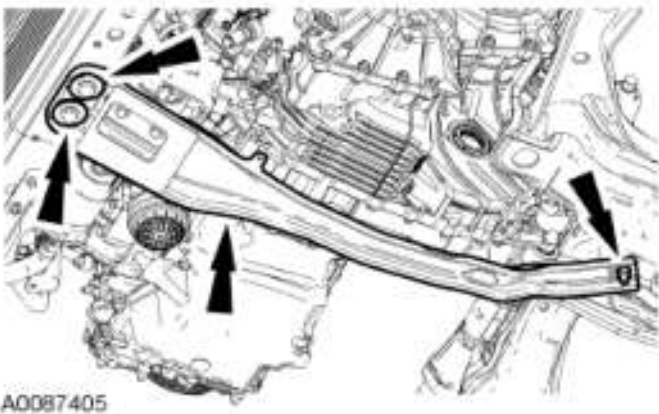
Identifying Engine Support Crossmember Nut And Bolts
